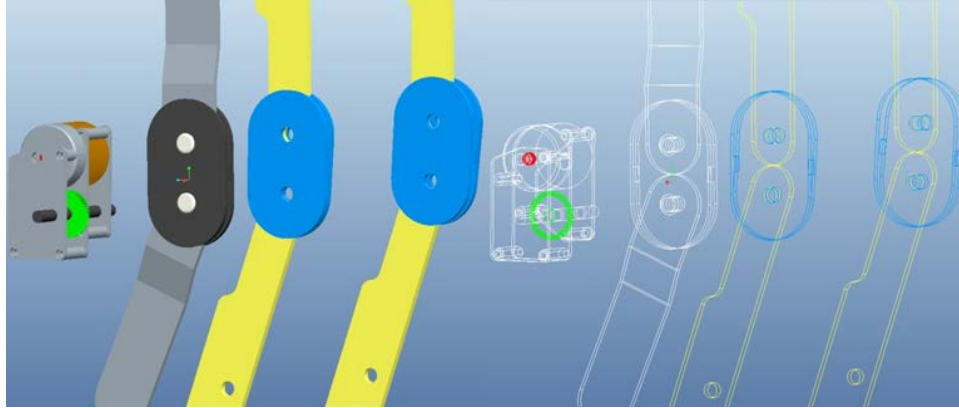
Pro/Engineer Exploded Subsystems Solid Model & Wireframe Views
